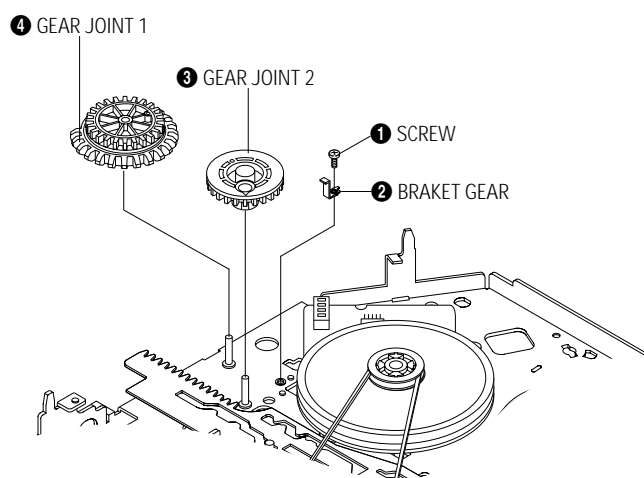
Bracket Gear, Gear Joint 1,2 Removal
